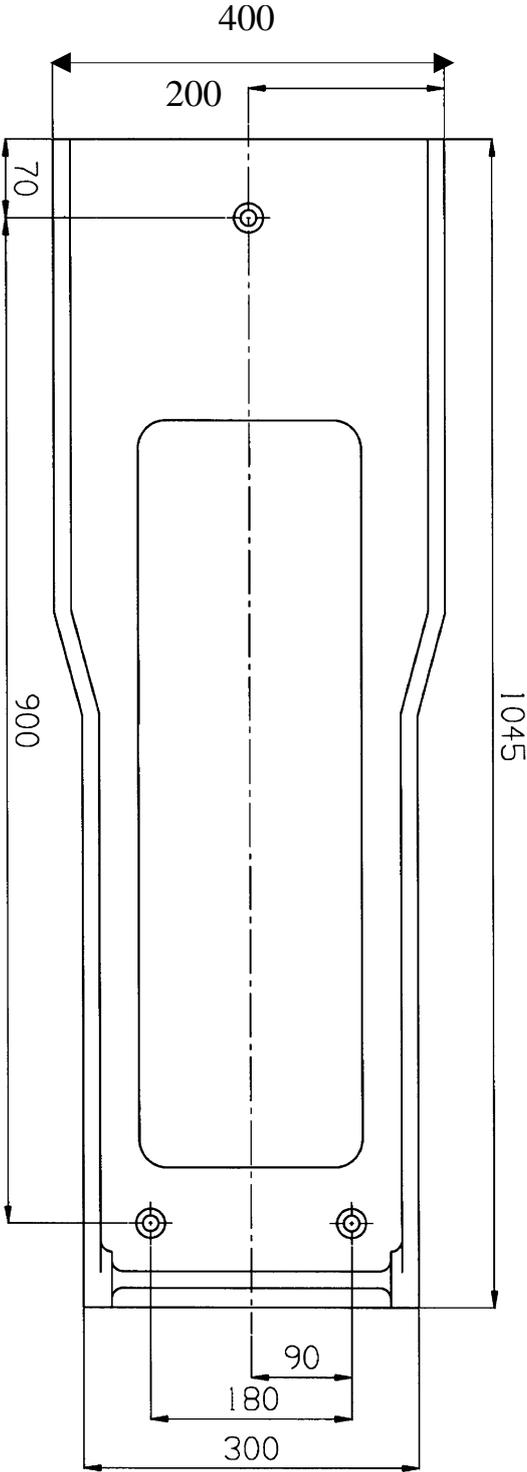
View of machine base footprint showing the 14 mm diameter securing holes.
